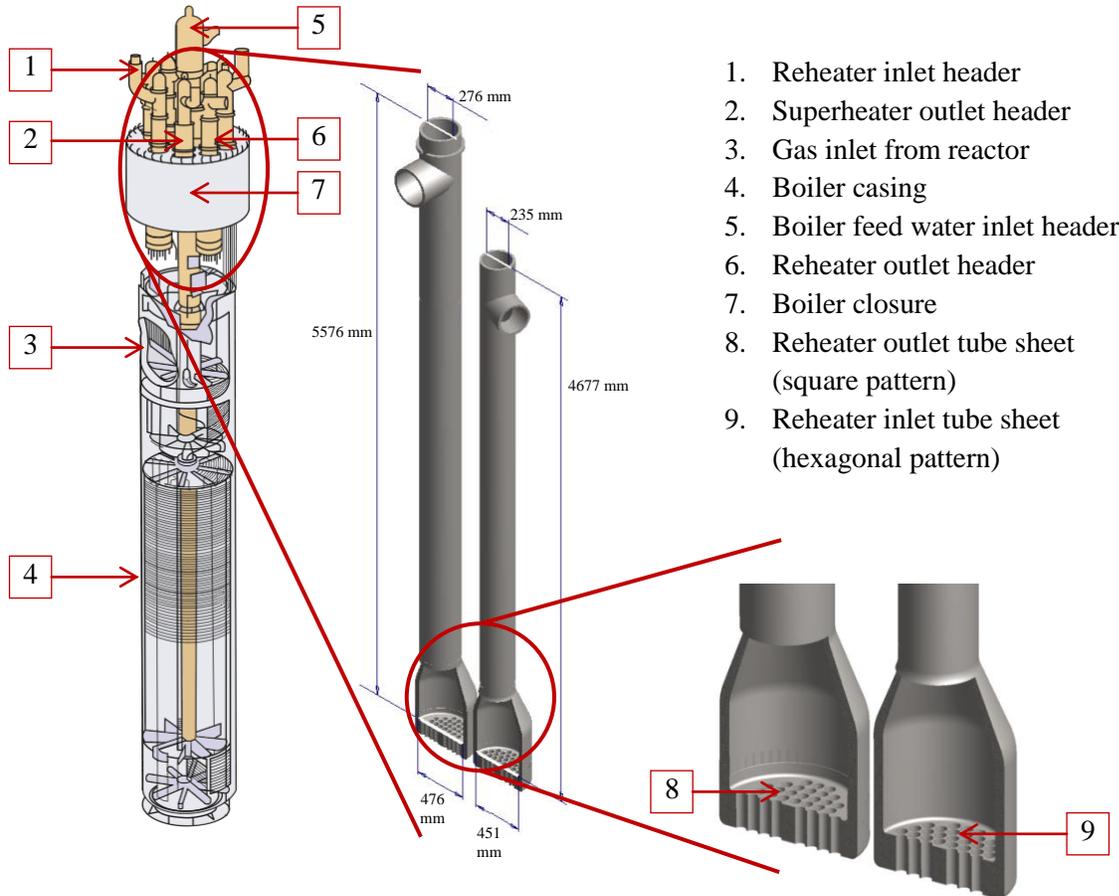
(left) Pod boiler by Ruffell (2011); (centre) Reheater inlet and outlet header; (right) Tube sheets
